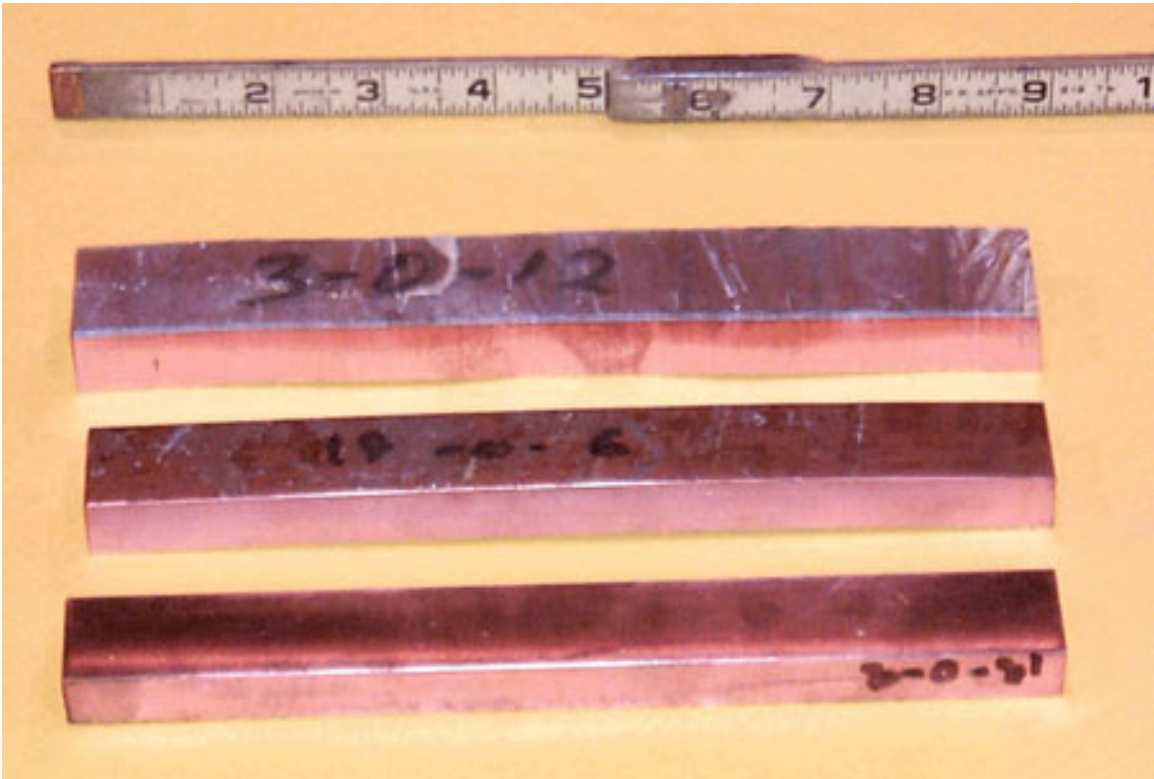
Typical tension coupons shown in various stages of machining prior to 'dog bone' milling
